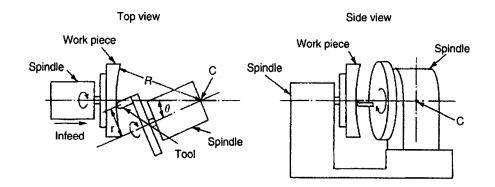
Schematic of a dual rotary axis fly cutting SPDT machine configured to cut concave spherical surfaces. (From Parks.¹¹)
